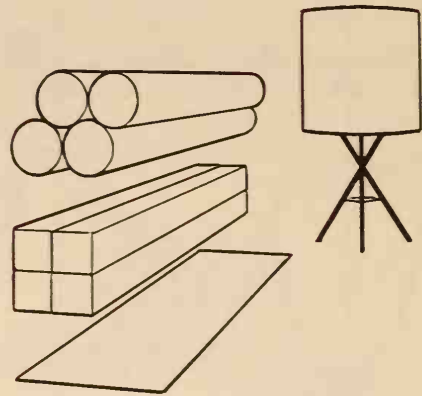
Rods, bars, and sheets of metal are used to make up a larger shape or mass.
